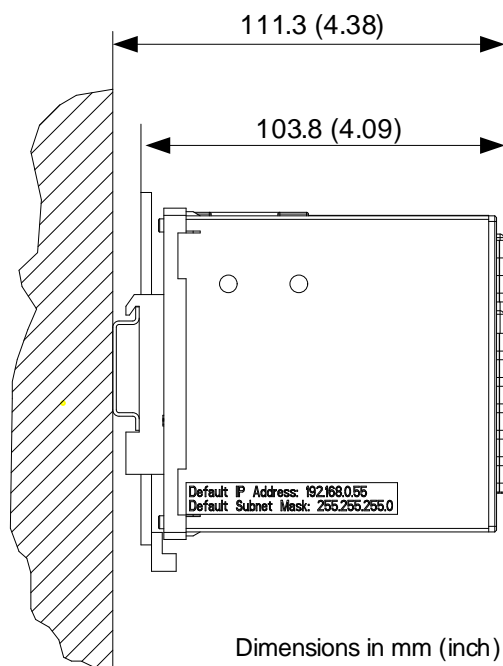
Dimensional Drawing of the I/O Unit 7XV5673
